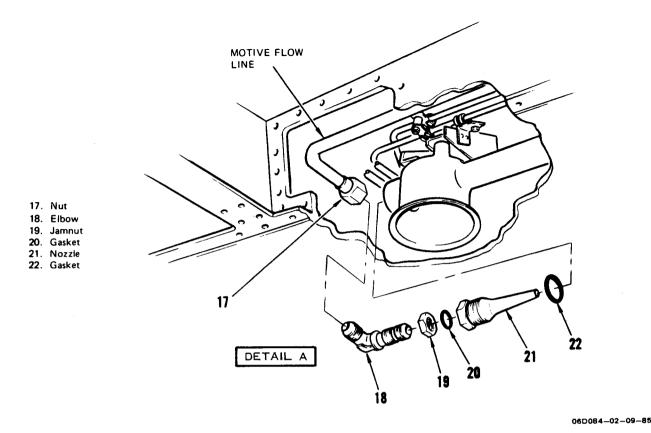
Removal and Installation; Wing Ejector Pump Nozzle (Sheet 2)
